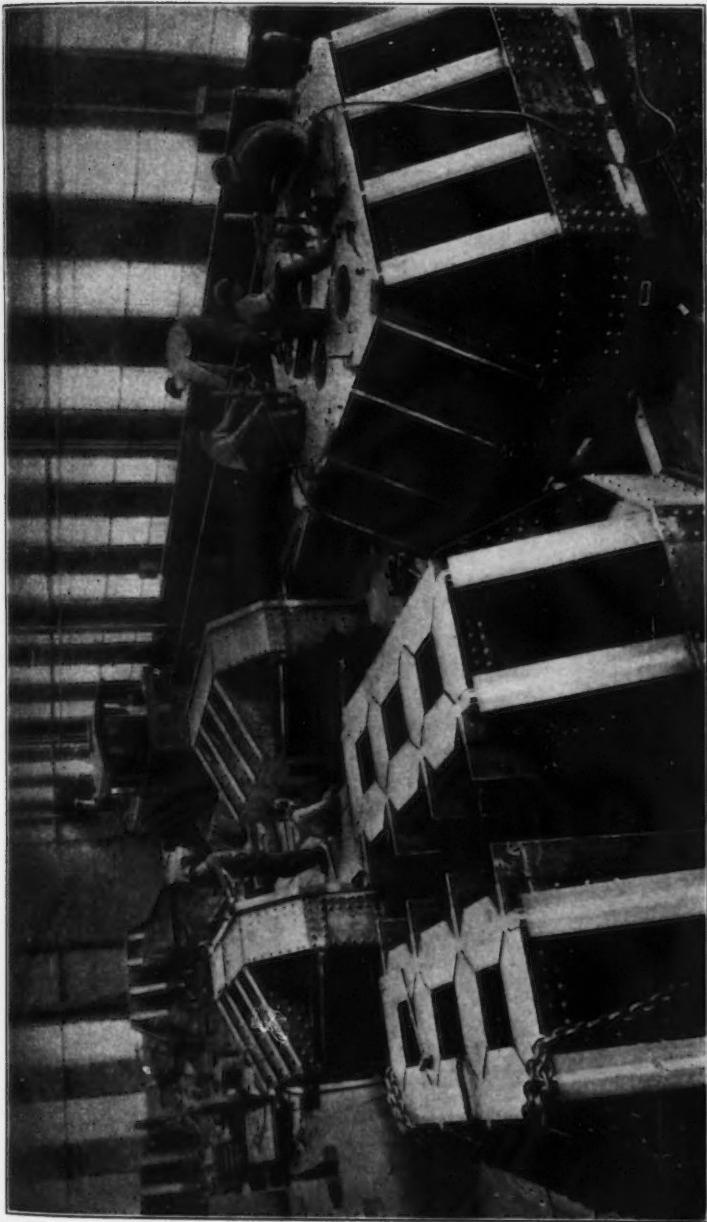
TOWER PEDESTALS IN PROCESS OF FABRICATION, GEORGE WASHINGTON BRIDGE.
